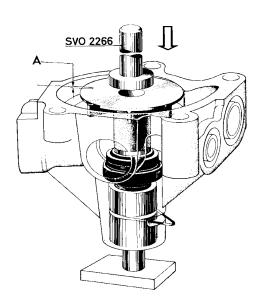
Fitting the impeller A = 0 to 0.4 mm (0.016")
